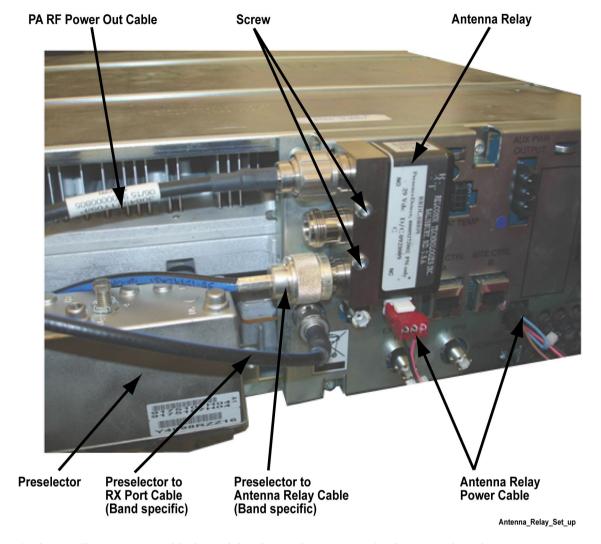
Antenna Relay Module Mounted on Backplane Cover
